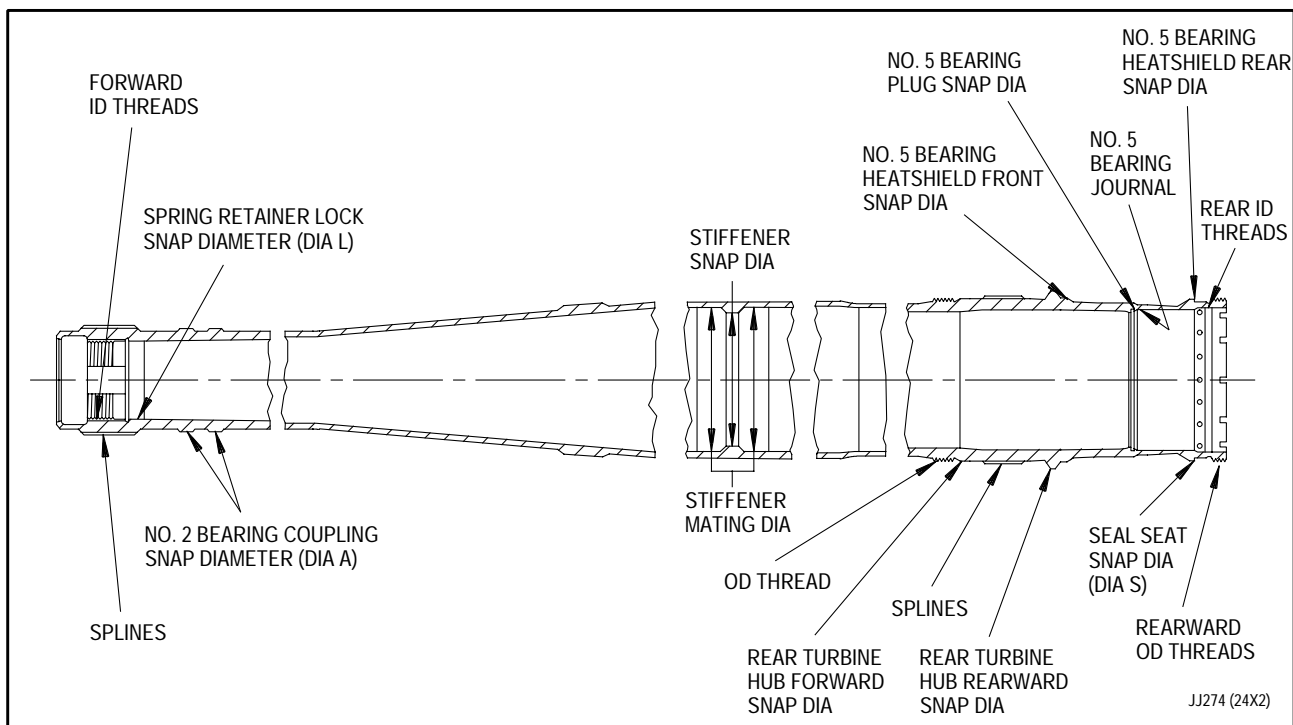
Front Compressor Drive Turbine Shaft - Blend Repair
